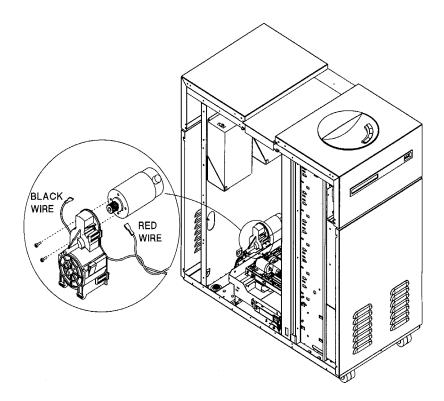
Cables and Mounting Screws on the Vertical Motion Motor
